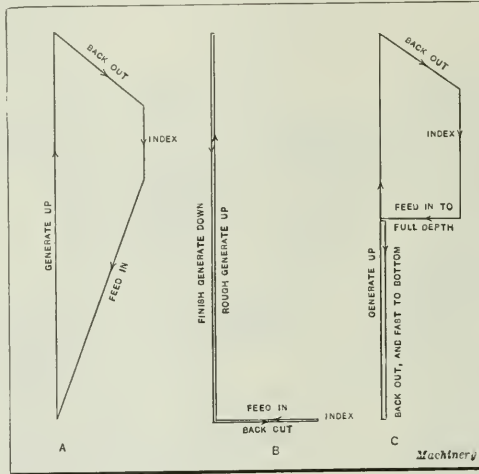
Three Different Cycles of Movements employed on Bevel Gear Generators
